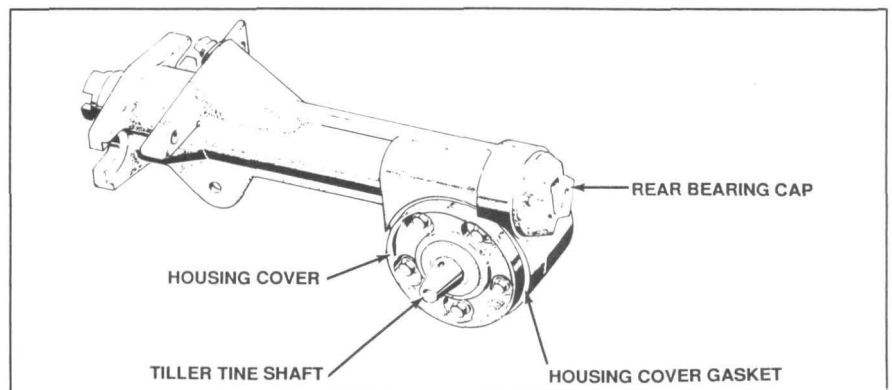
Pre-Disassembly Inspection of the Tiller Attachment.
